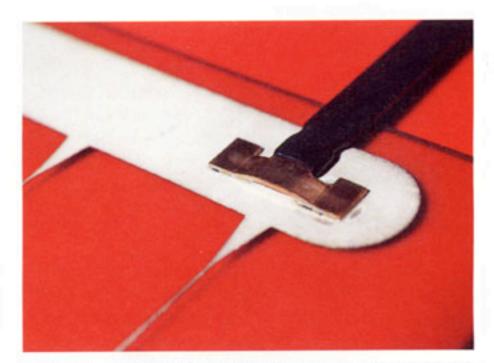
F. The windscreen electric heating terminal contact is soldered directly to the solder pre-coated connection pad on the glass pane.
